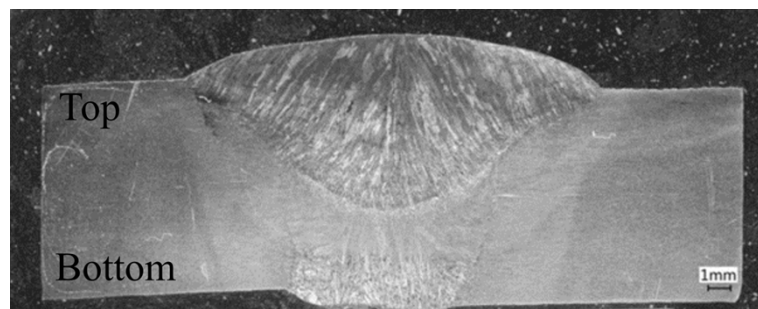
Cross sectional macrograph of SAW weld.
